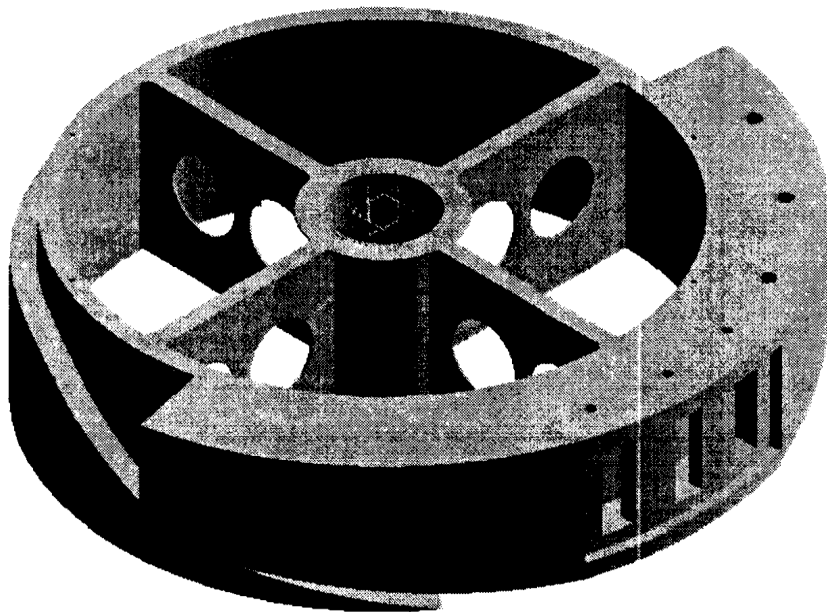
The Upper Cam Group of the 5.4-inch Diameter Mold Rotary Press
